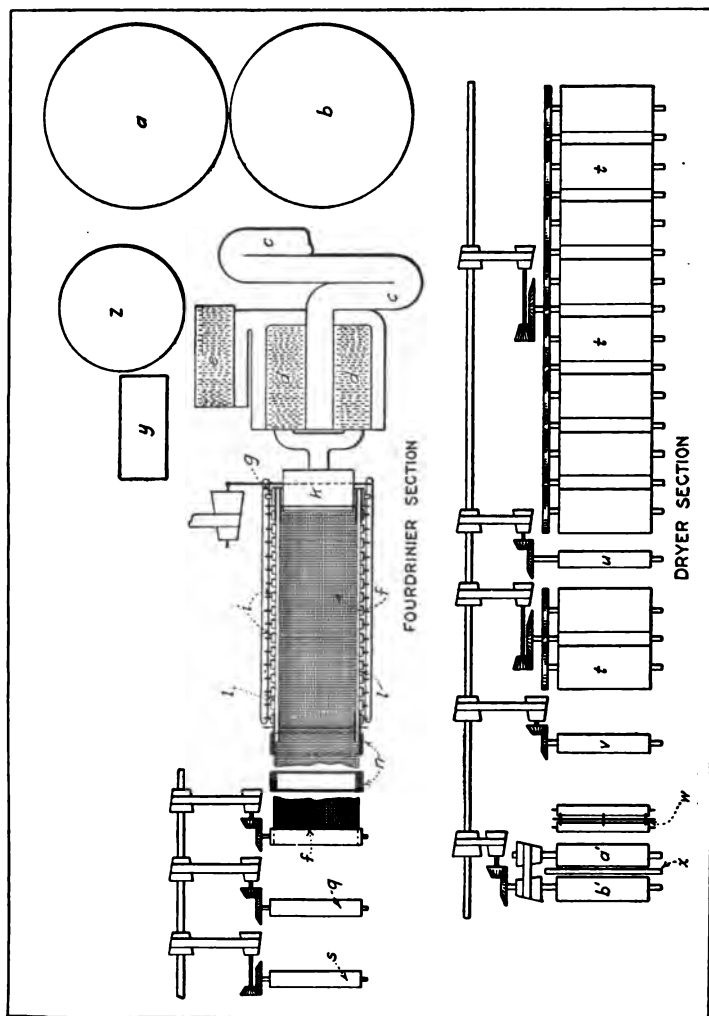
PLAN OF A FOURDRINIER MACHINE
